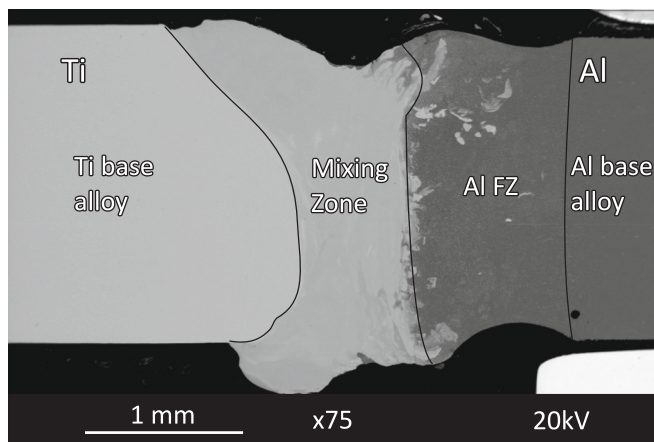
A general view of the welded joint cross section without the beam offset (BSD image).
